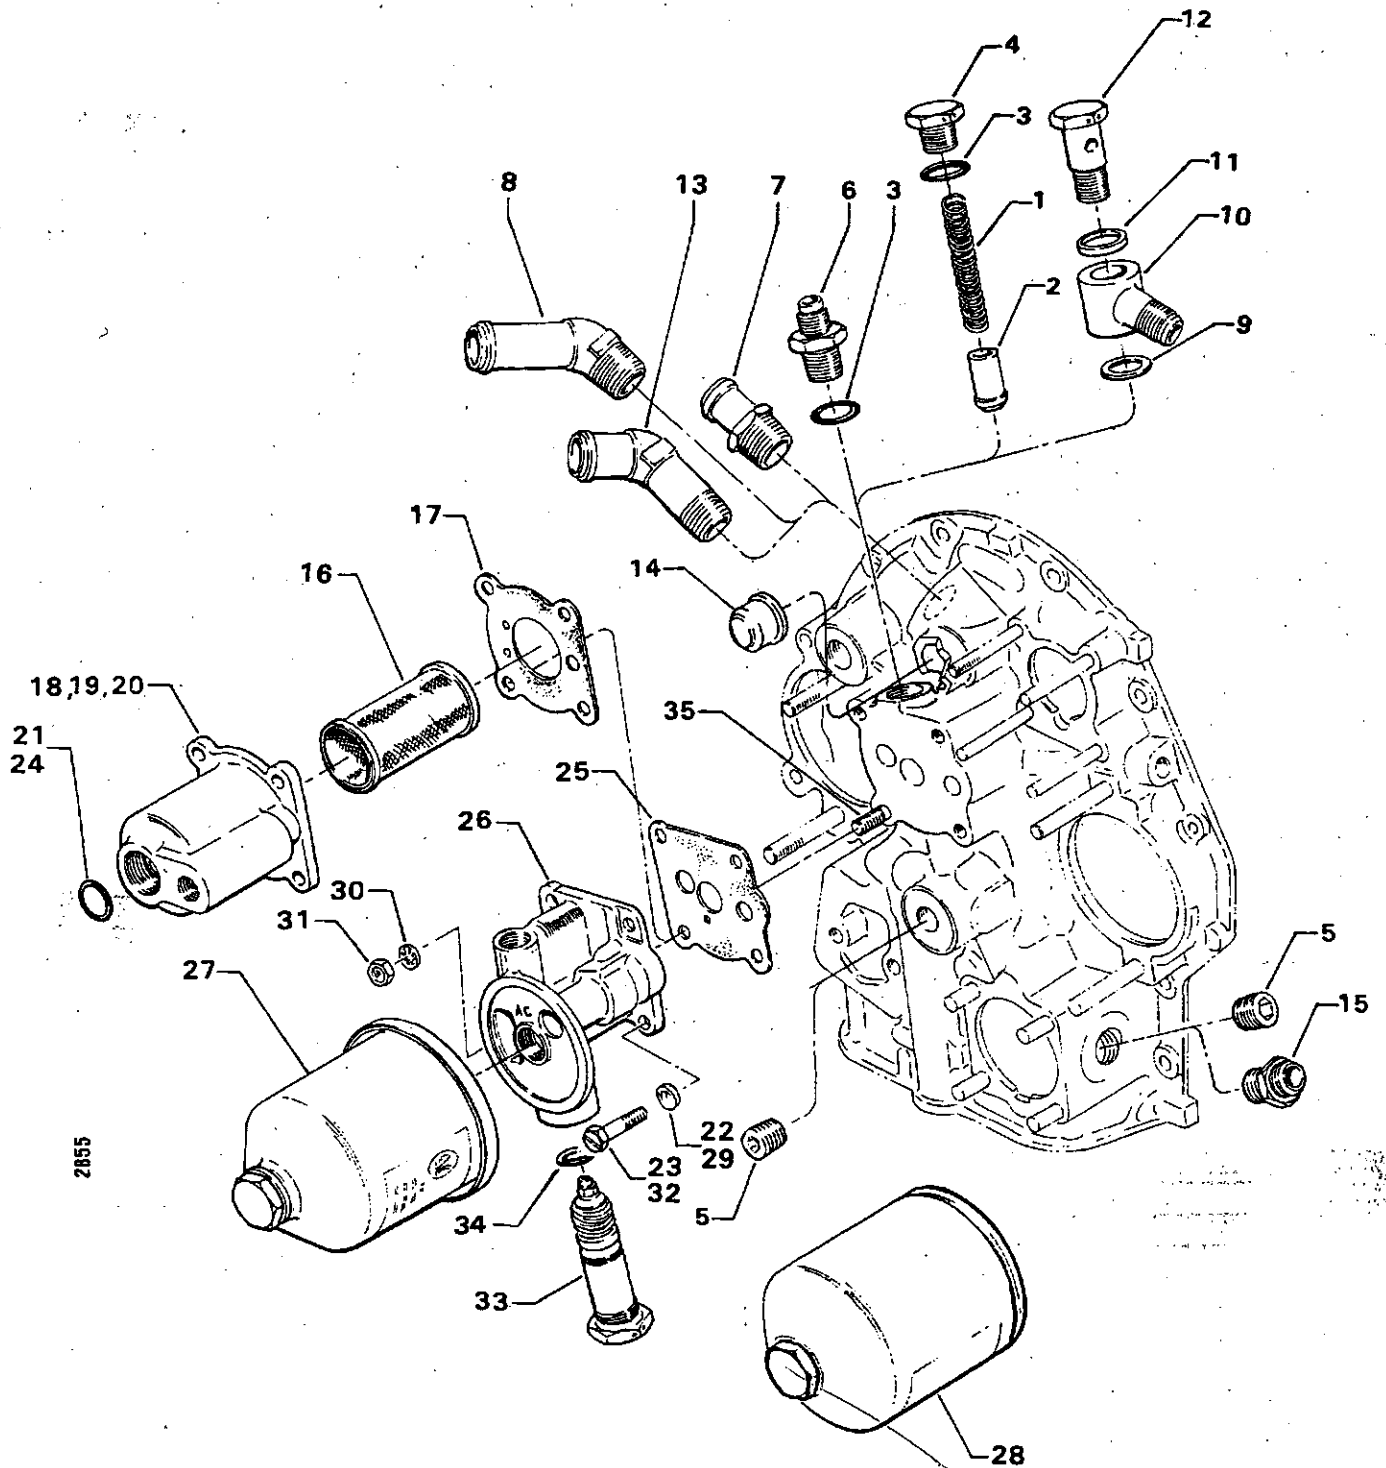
OIL FILTER ASSEMBLY AND OIL COOLER BYPASS VALVE
